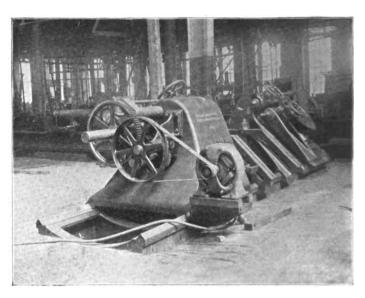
GIBBS MOTOR DRIVING QUARTERING MACHINE.
